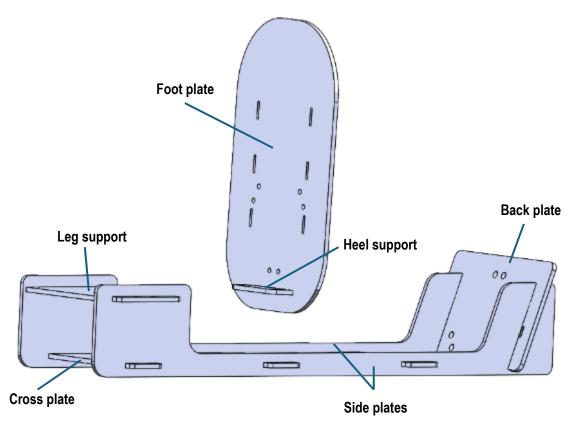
Assembly consisting of the polypropylene parts for the base- and foot plate.
